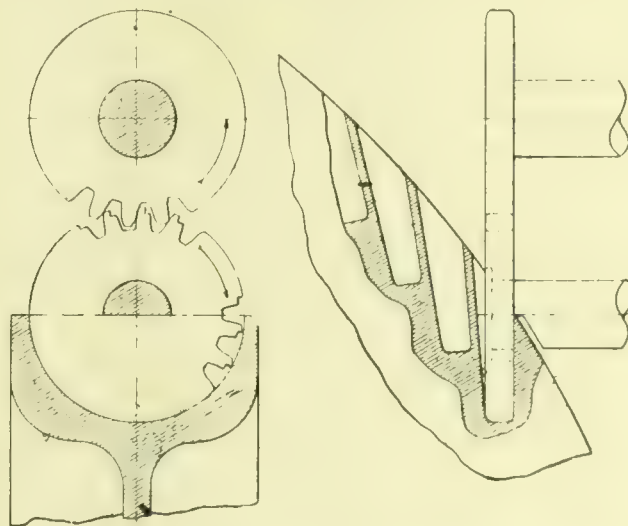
SHOWING HOW BUCKETS ARE FORMED IN THE ROTOR.
